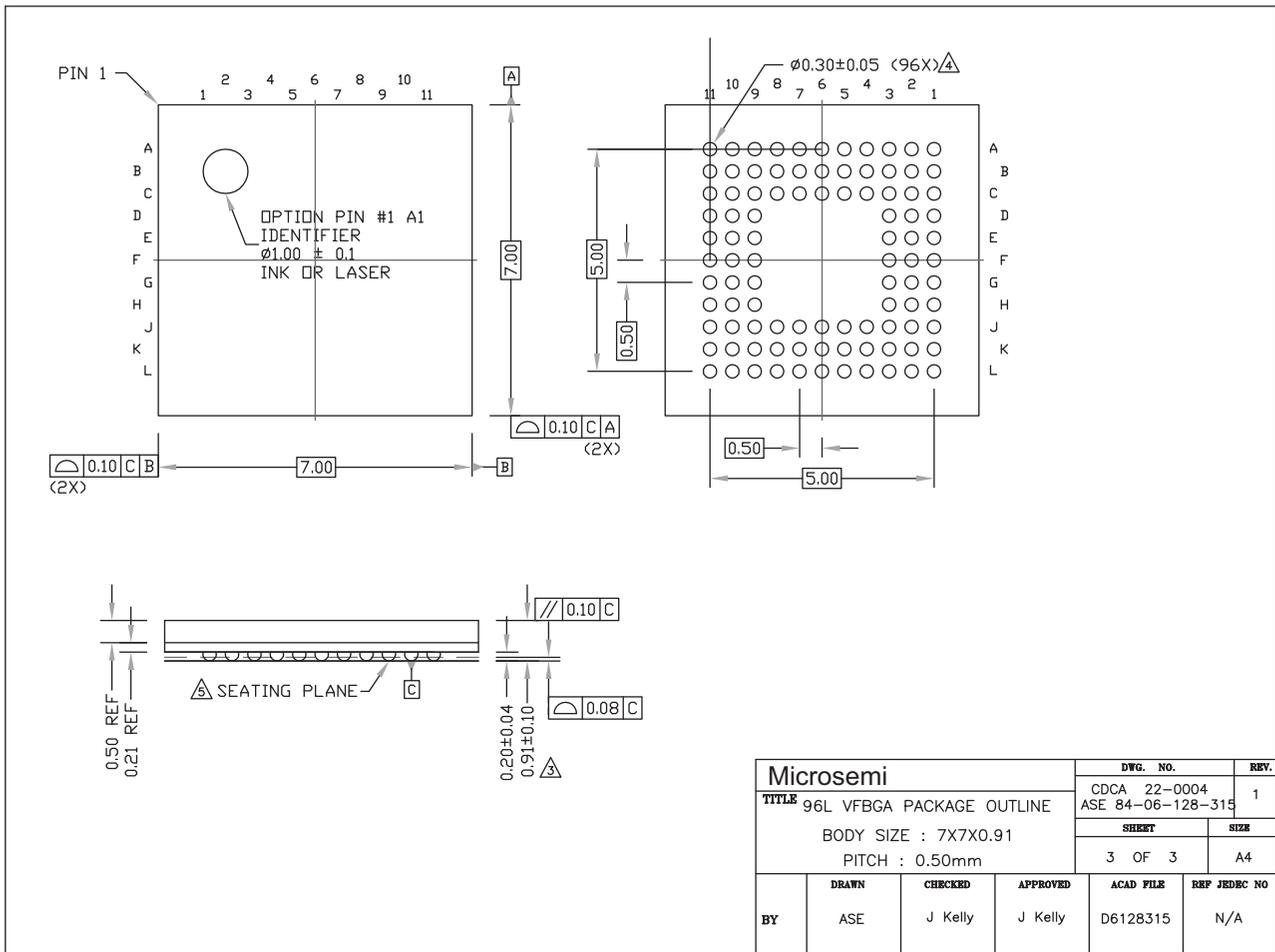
ZL38004 (96-Pin CABGA) Package Drawing
